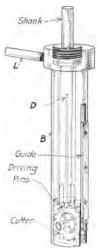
Key seat milling device, (National Machine Tool Co.) showing method of driving the cutter. The body B is cylindrical and fits the hole to be keyseated (or the bushing). The cutter has stagened by grinding on the face. The spindle D is off-set from the center of the body. It is provided on the lower end with cutter driving pins and at the top with either a straight or taper shank. The handle against any suitable stop to keep the body from turning. The guide serves to keep the keyseat in
